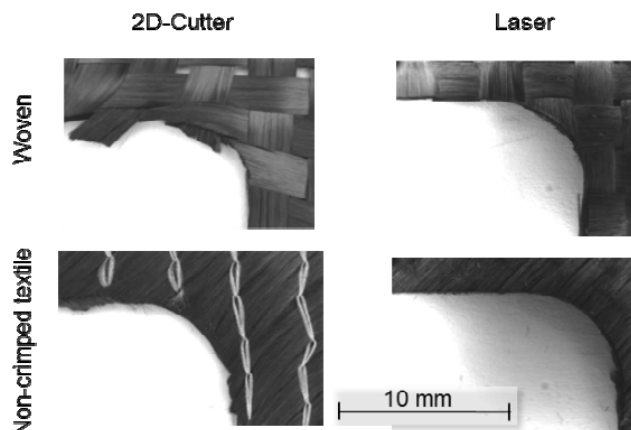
Comparison of the cutting edge for contact (left) and contactless material processing by laser (right)
